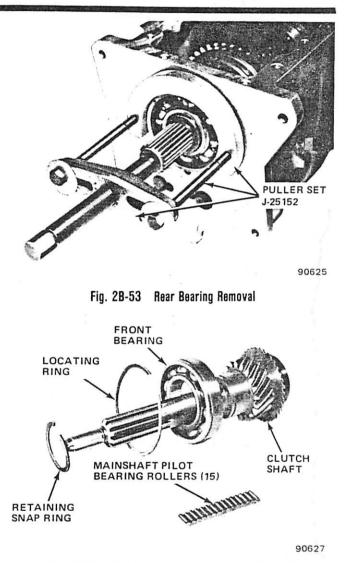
B-54 Clutch Shaft and Front Bearing Assembly
